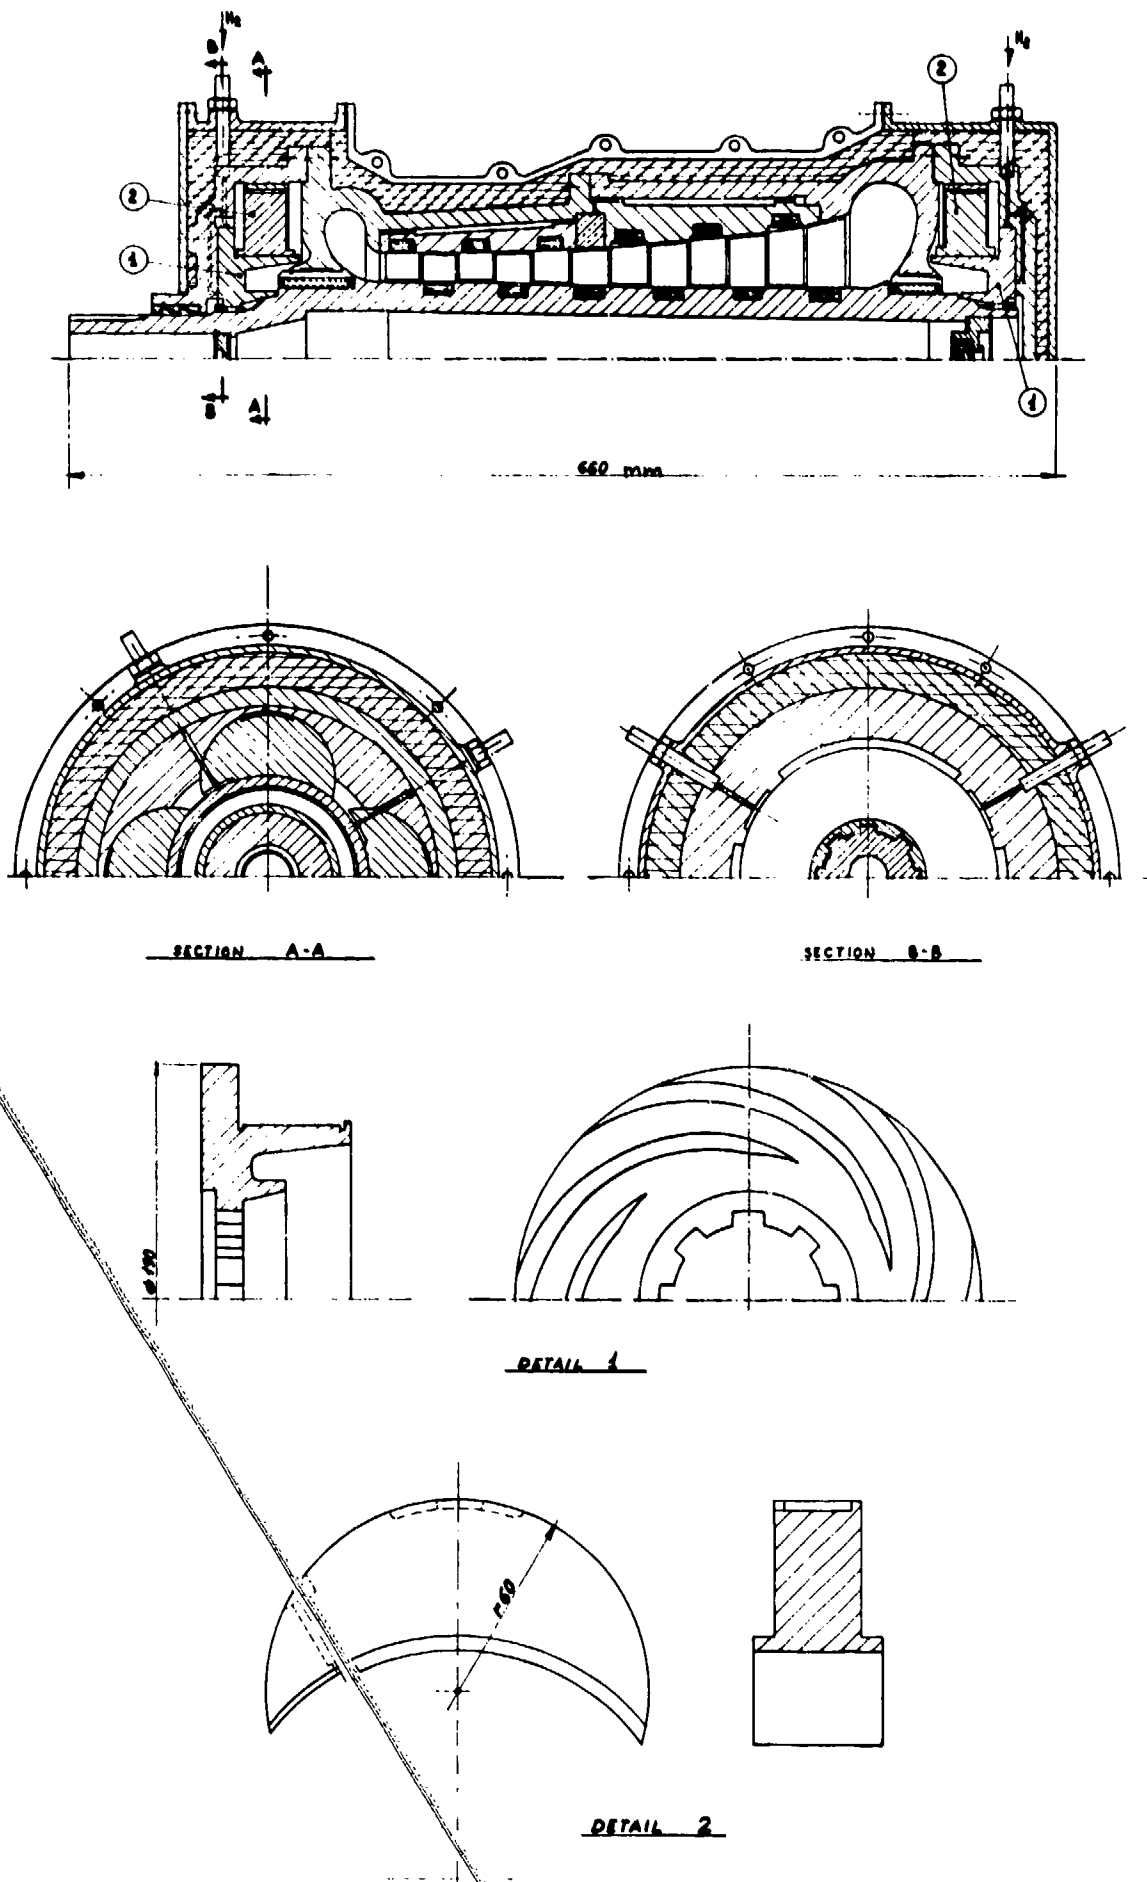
Hydrogen cryogenic expansion turbine with dynamic lift and thrust gas bearings: shaft power, 2 365 kW; longitudinal length 660 mm.
